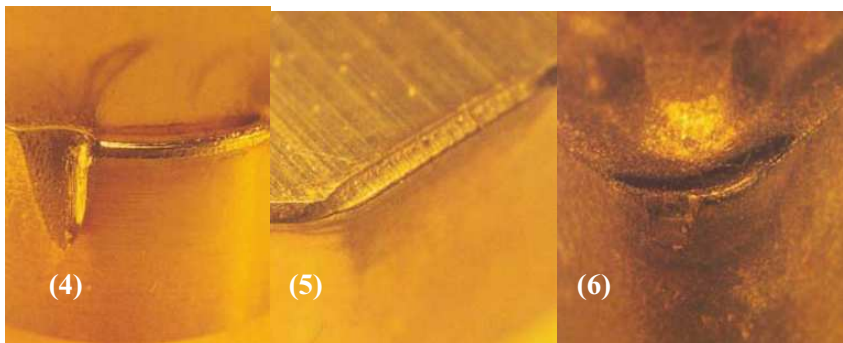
Cutting tool wear types: (4) notch wear; (5) thermal cracking; and (6) mechanical fatigue cracking
